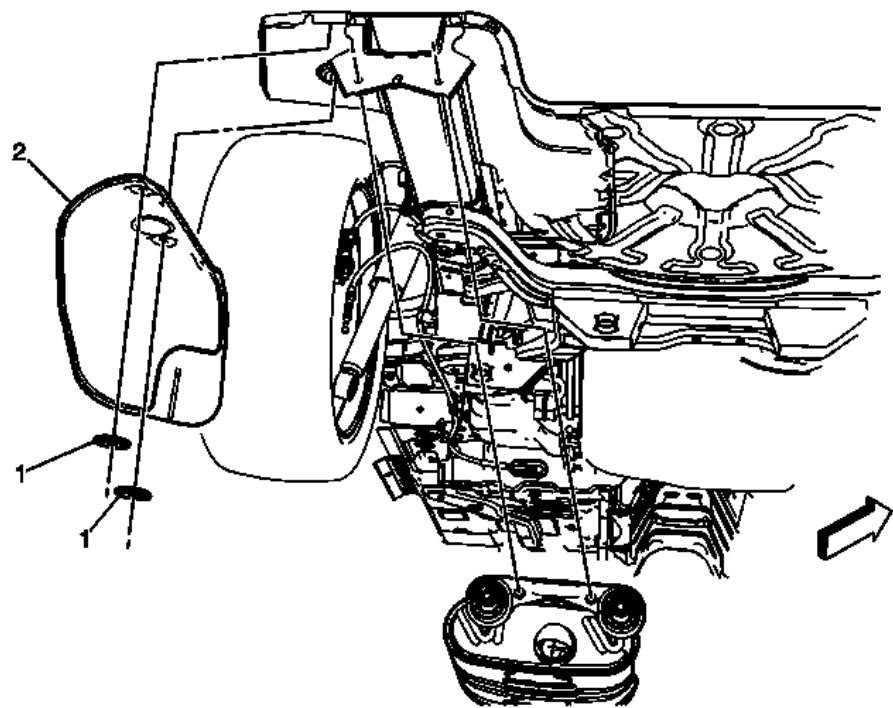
Exhaust Rear Muffler Heat Shield (Left Rear Outer)
